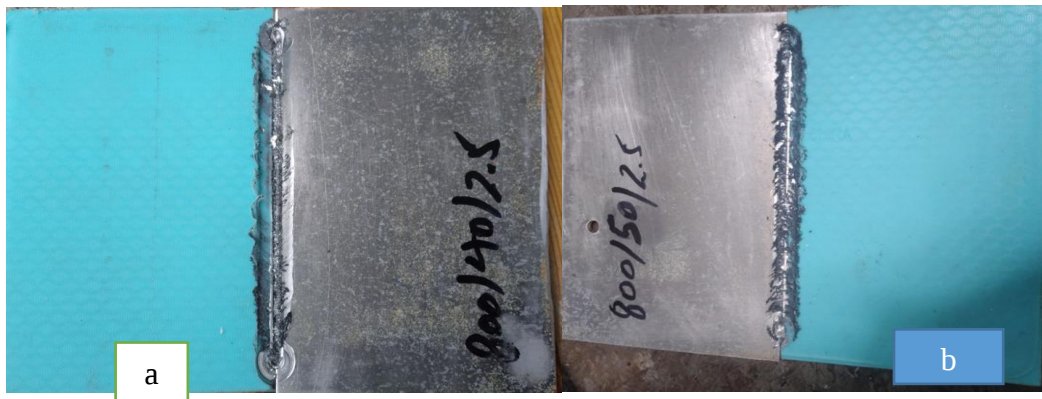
8 FSW joints made by a) 800RPM and 40mm/min b)800RPM and 50mm/min
